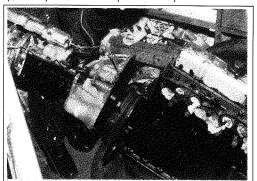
With the engine and gearbox unit secure in a purpose made stand or in this case. the combination of a wheel and tyre and a block of wood, split the gearbox away from
